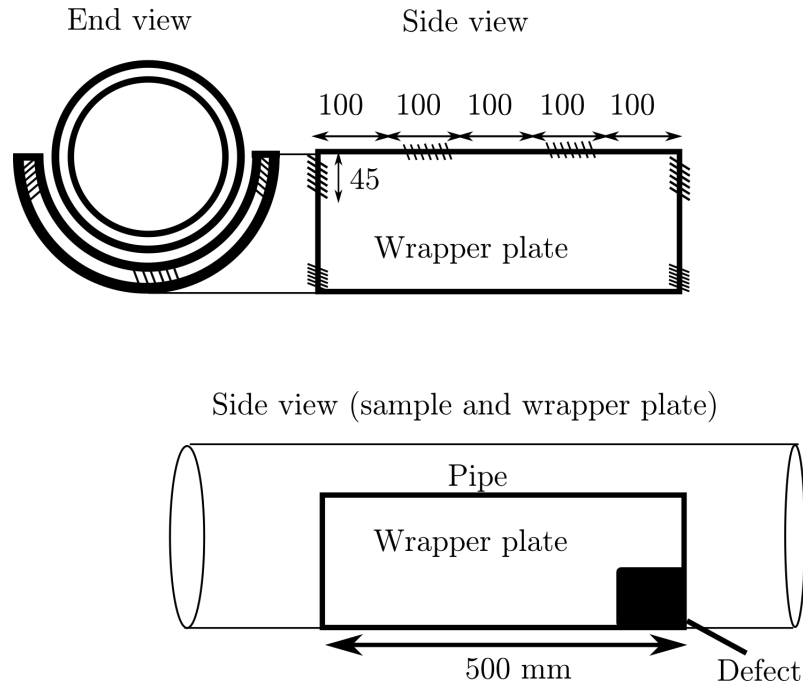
Dimensions of the sample with the wrapper plate and the position of the welds, the encoded scan extends slightly further to either side of the wrapper plate area.
